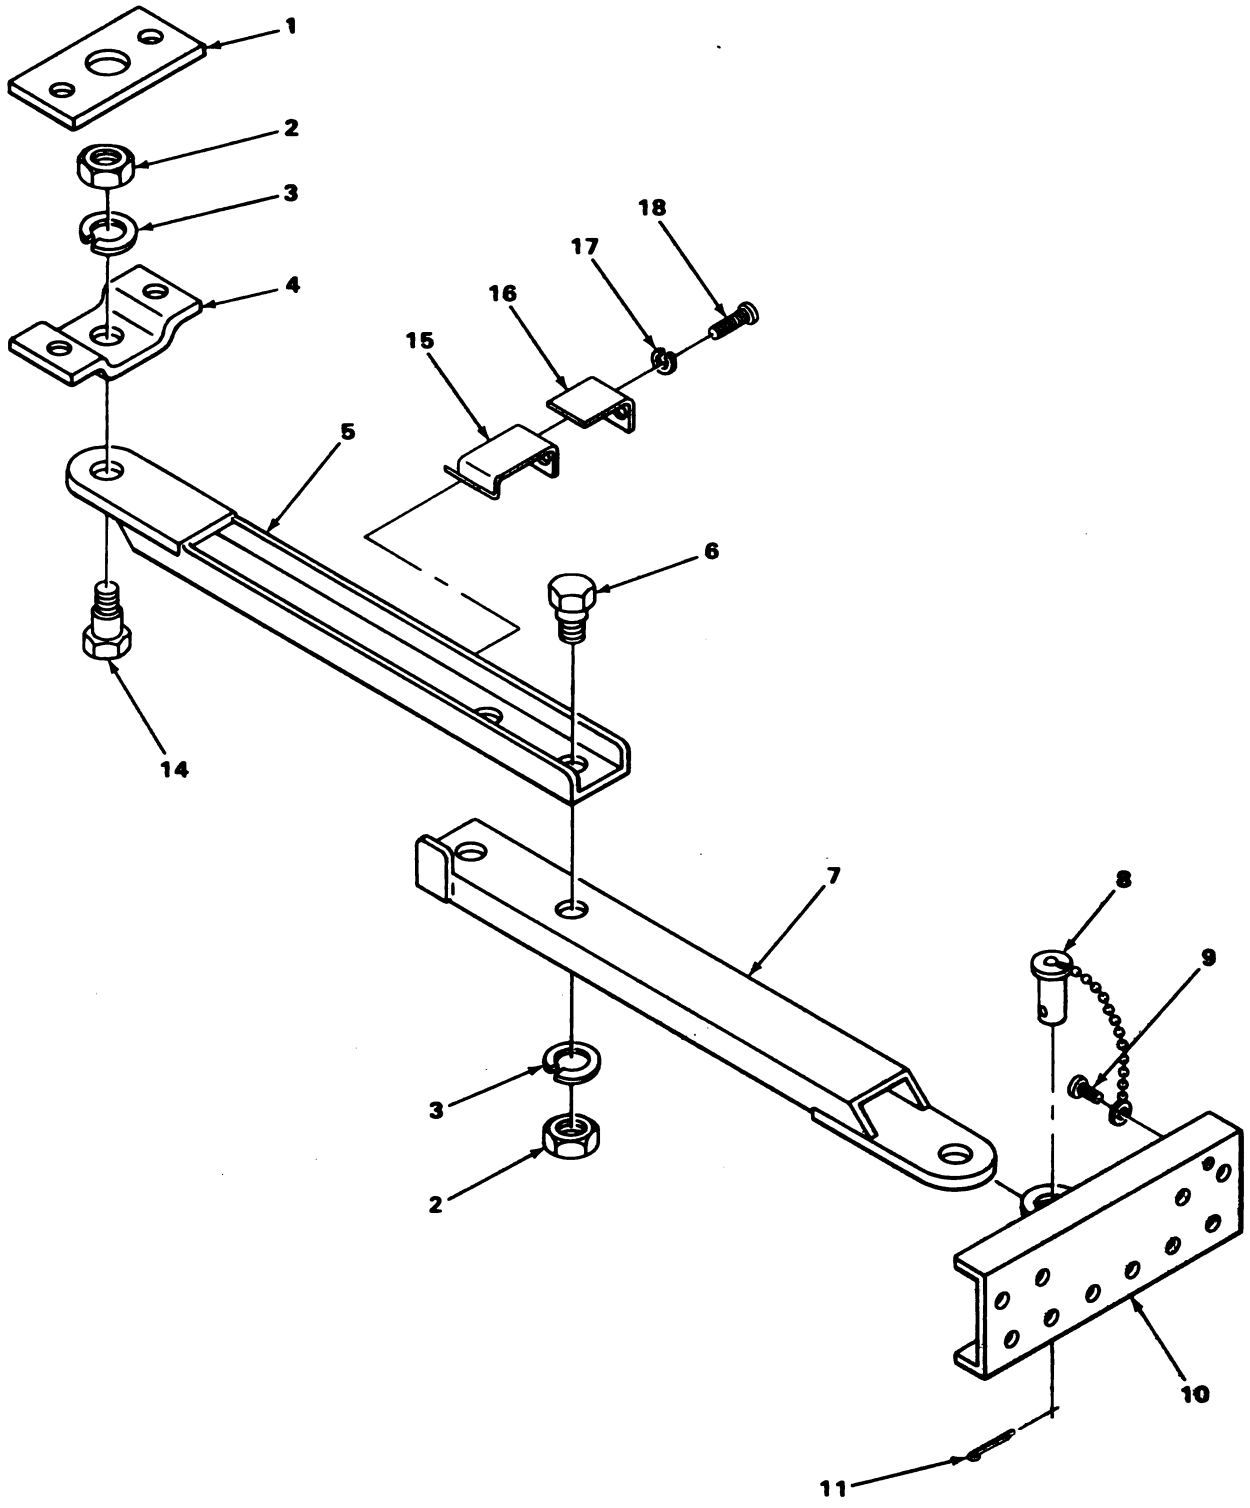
SMALL DOOR LATCH ASSEMBLY (S-318/G).
